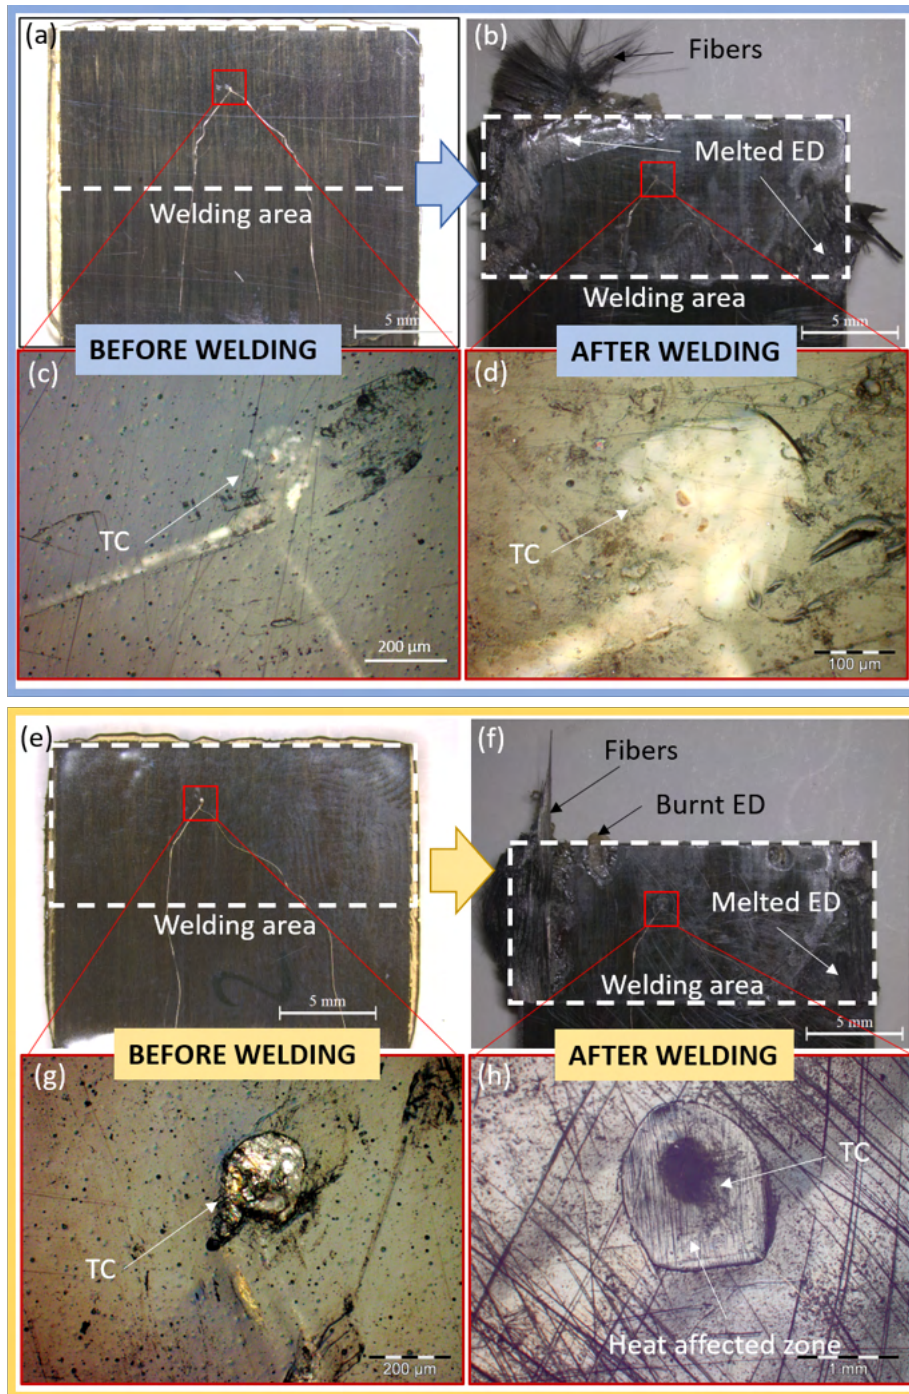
Micrographs of the welding interface before (a, c) and after (b, d) welding experiment of Fig. 4.7 (a) and before (e, g) and after (f, h) welding experiment of Fig. 4.8 (a)
